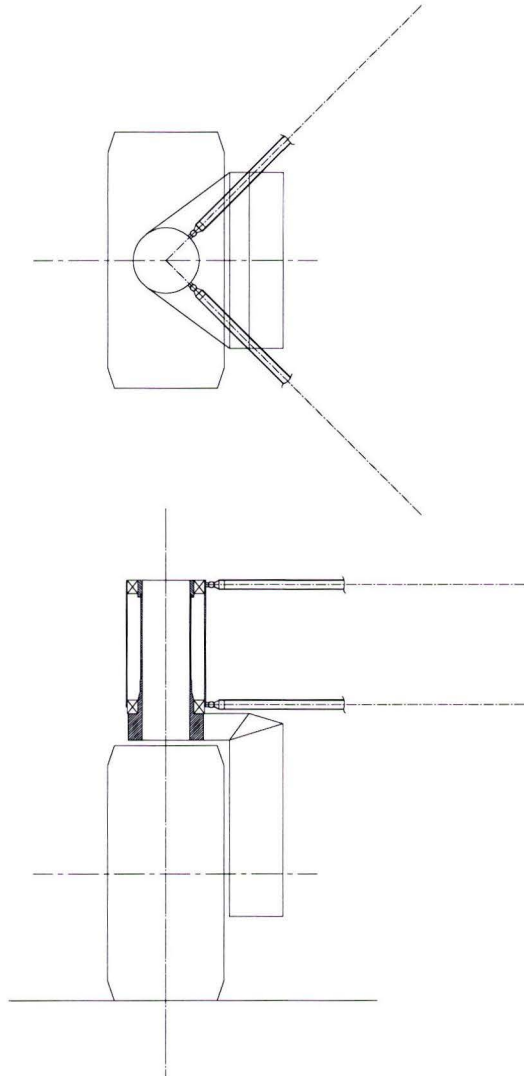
Top and side view of the double wishbone suspension, schematic, partially cross-cut
